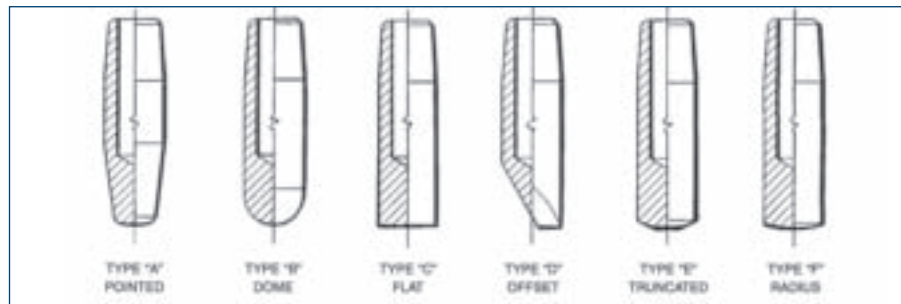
Standard spot welding electrodes. (Illustration courtesy of the RWMA.)
